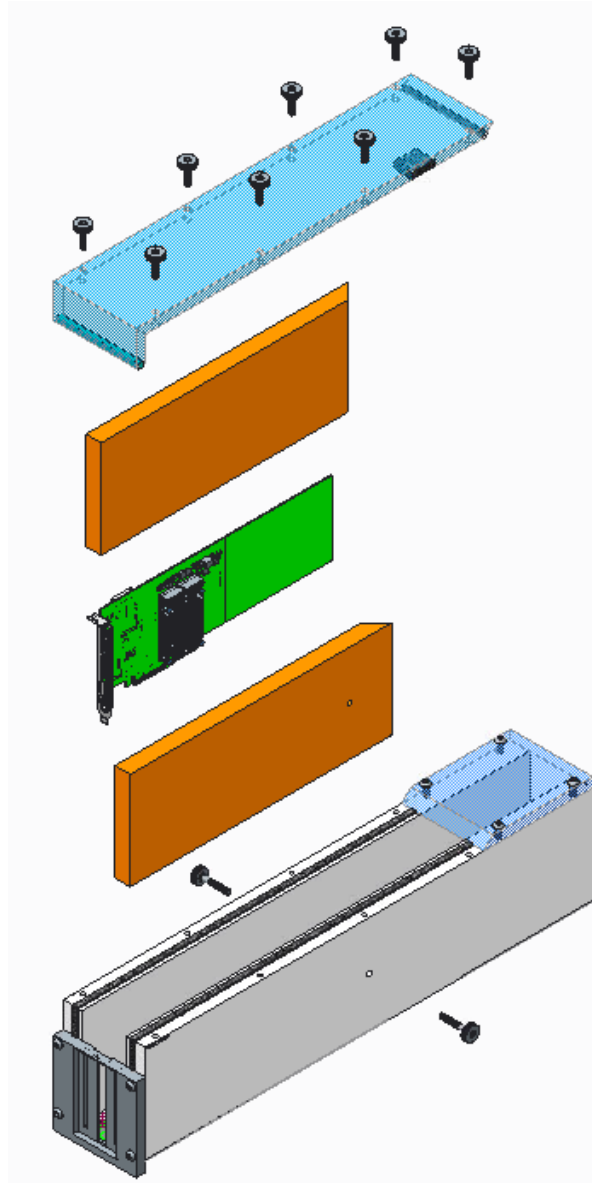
Tester isometric exploded view: {Lid, AFI Block, Add-in Card, AFI Block}
